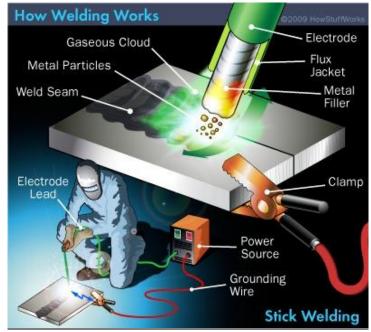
The process of arc welding (HowStuffWorks [8]).
